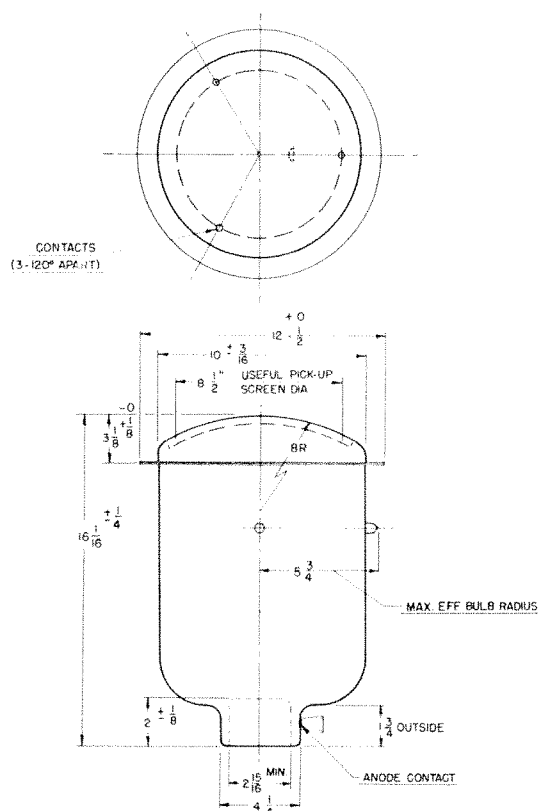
Dimensional view of the large diameter x-ray image intensifier tube.
